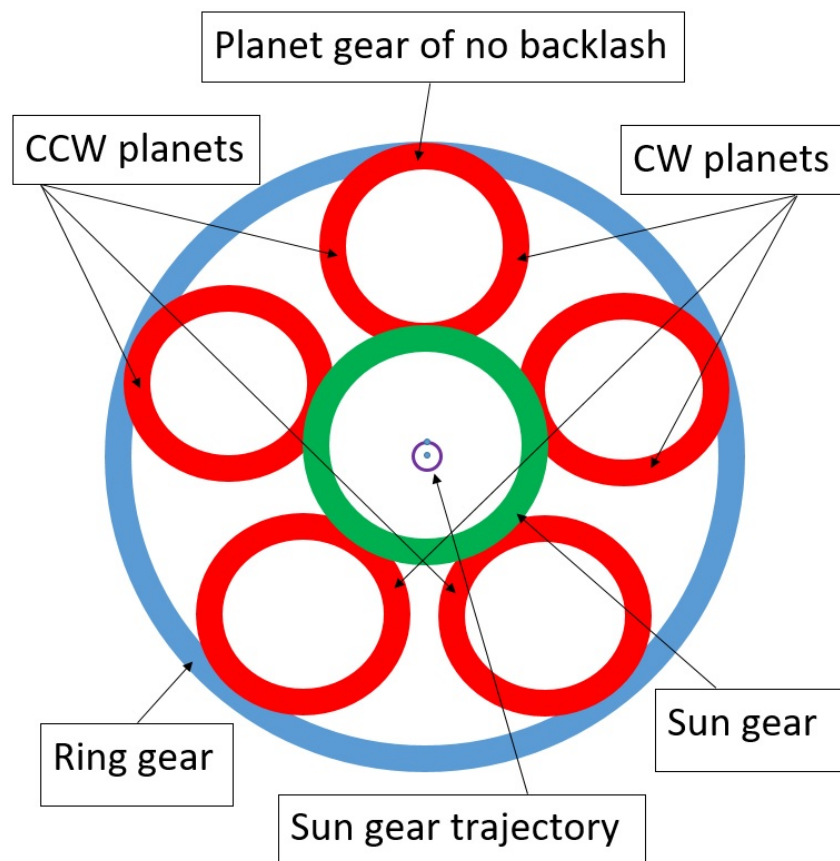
Schematic construction of a backlash-free bearingless planetary gearbox with five assembled planets.
